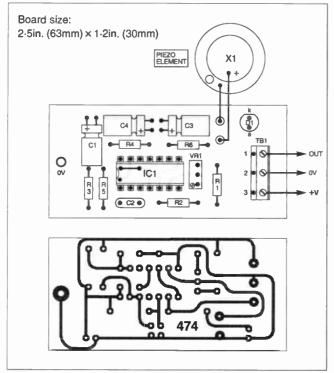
Printed circuit board component layout, underside copper foil master pattern and wiring to the piezo element.
